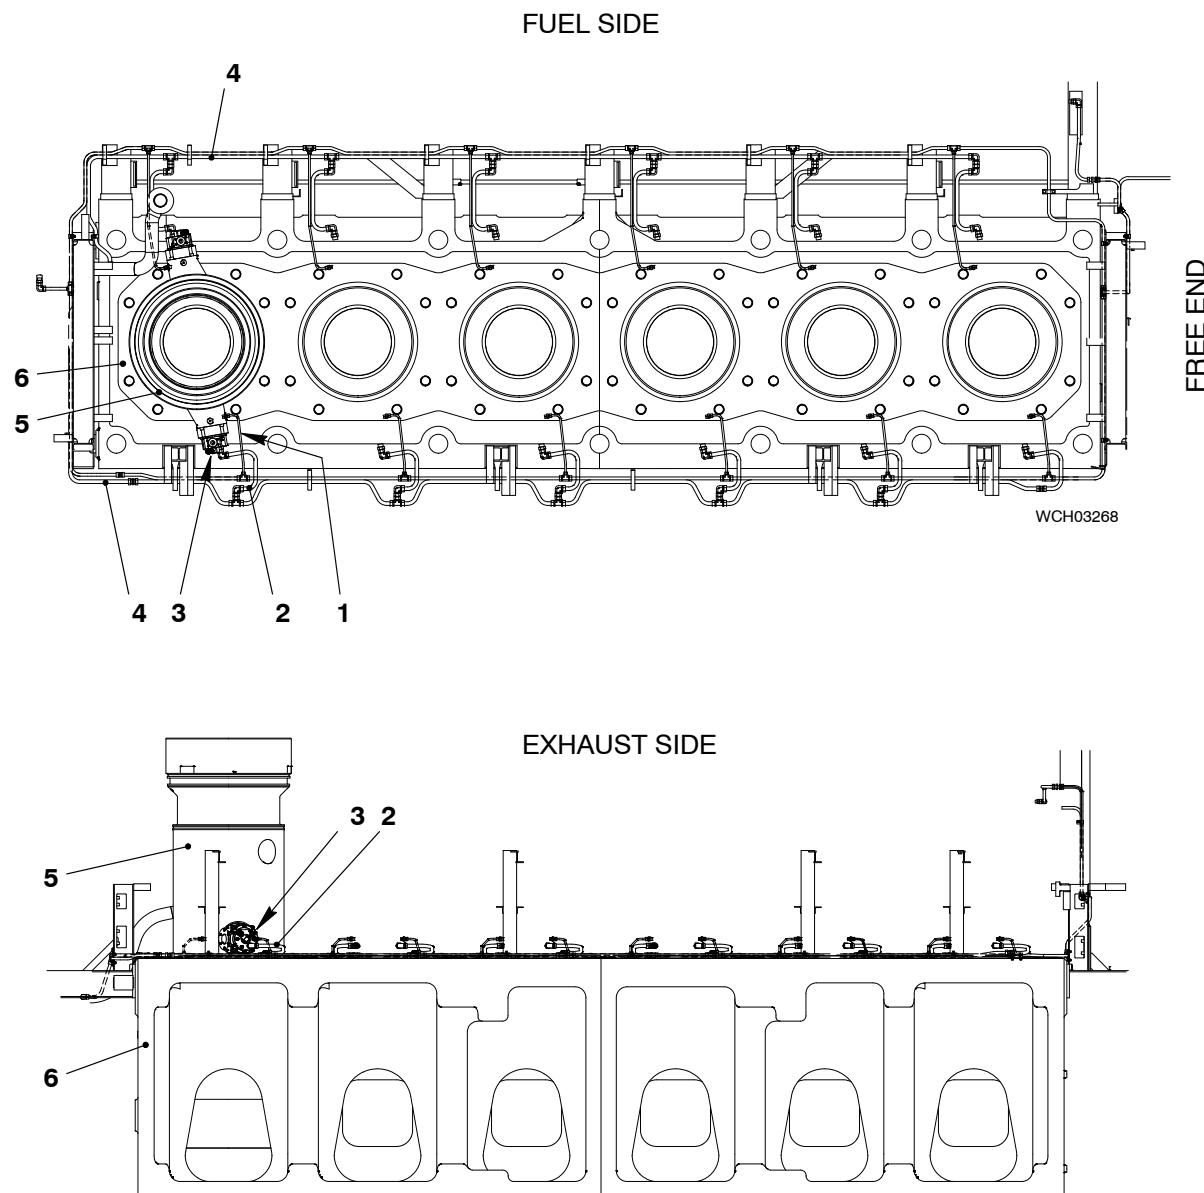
Servo Oil Connections (Lubrication and Oil Seal)
